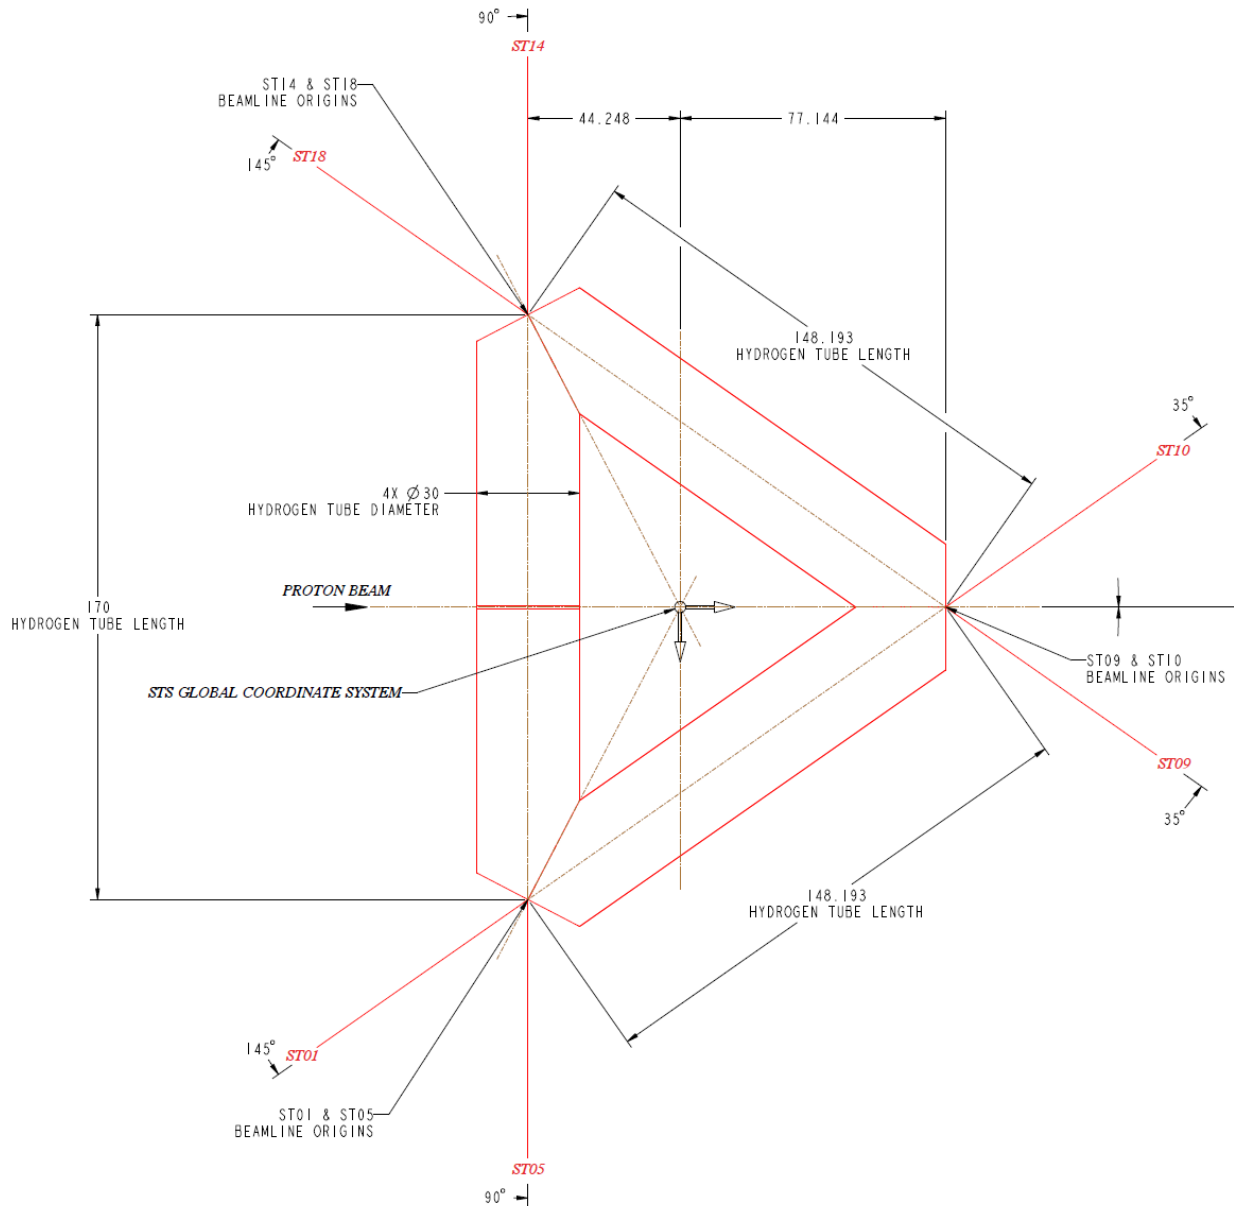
Tube Moderator Beamline Layout Plan View (dimensions in mm).
